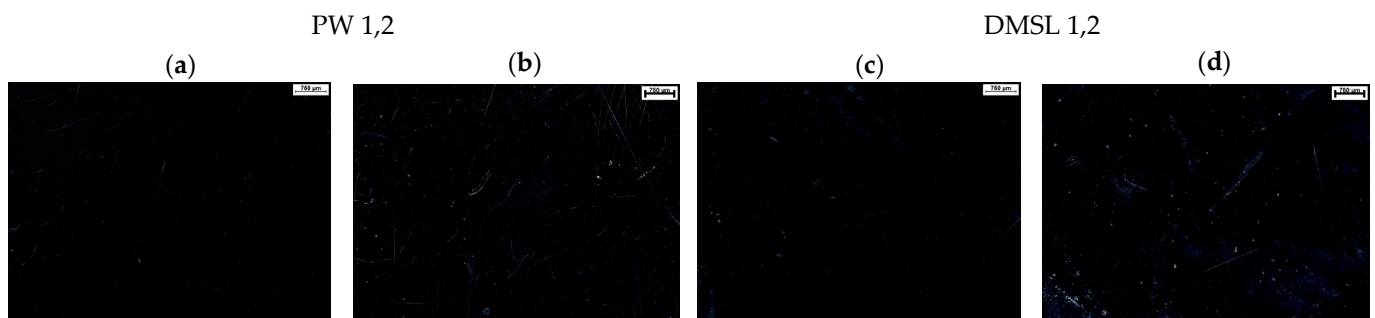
Examples of bar and 3D printing specimen surfaces: (a,c) before pitting corrosion testing, (b,d) after pitting corrosion testing.
